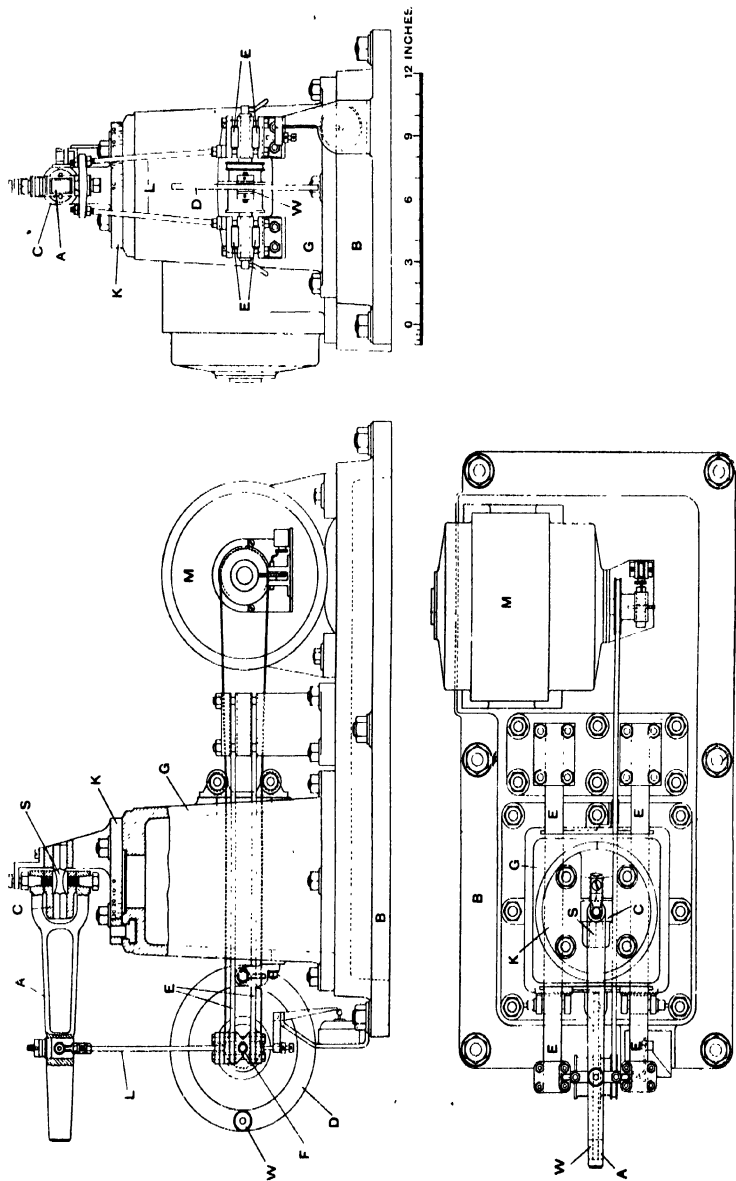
COMBINED STRESS (BENDING AND TORSION) FATIGUE TESTING MACHINE
